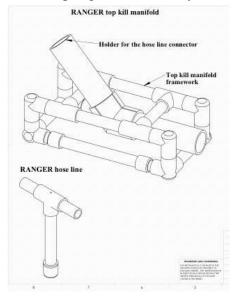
Ranger Class Top kill manifold and Hose line isometric CAD drawing.
